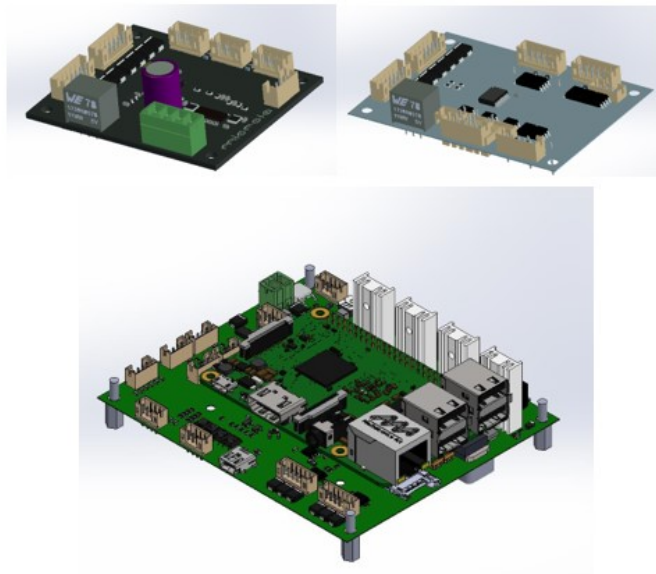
CAD renderings of electronic boards. From the upper-left Moto-syringes board, valve board, motherboard.
